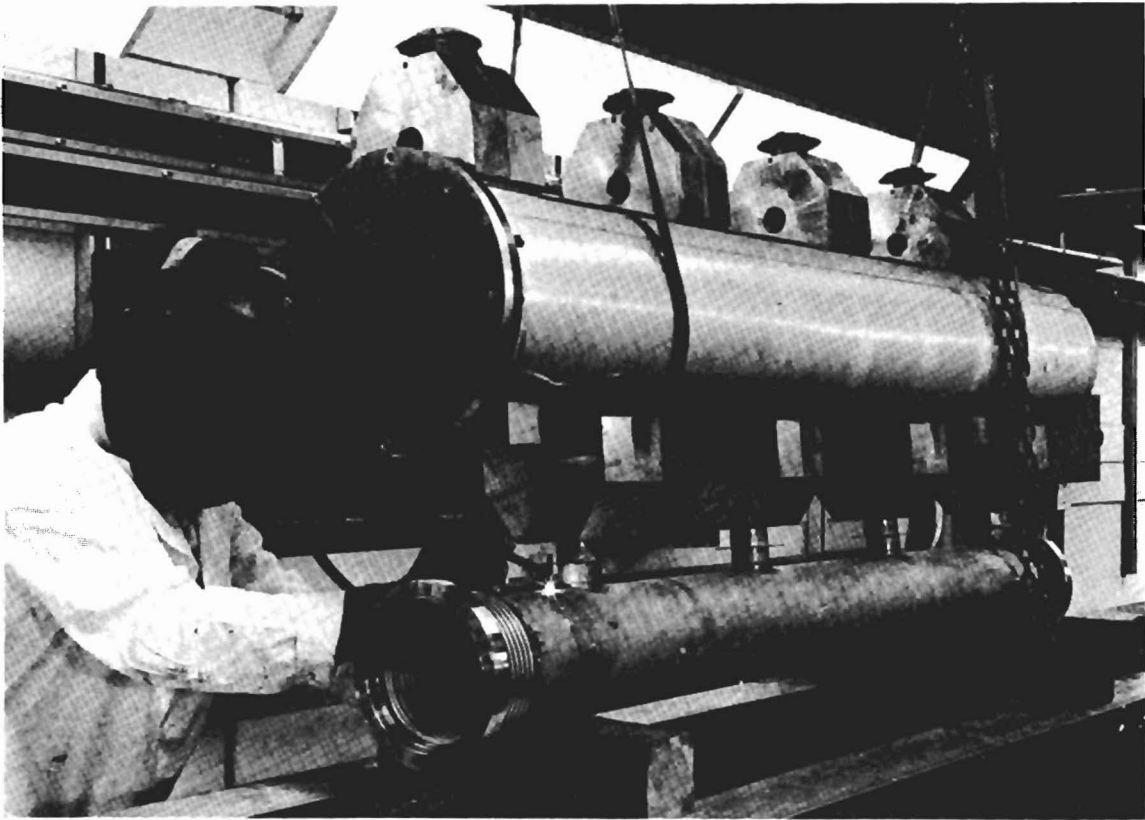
Attachment of Vacuum Manifold to EPA Tank
